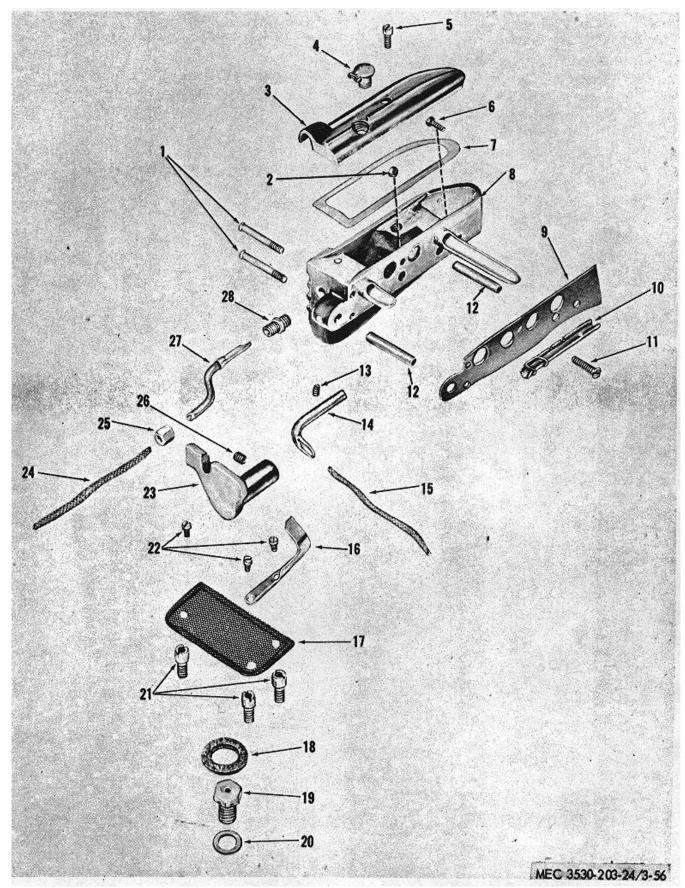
Overedge sewing machine frame oil cooler, disassembled. 99
